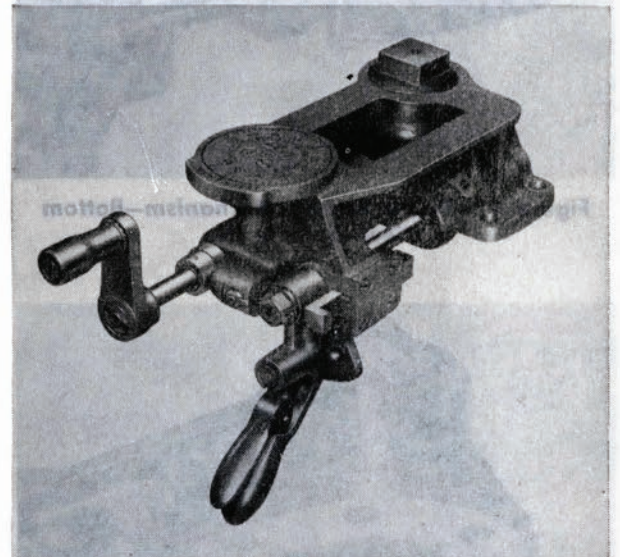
Depth Setting Mechanism—Left-Hand Tube—Spindle Locked OUT.
